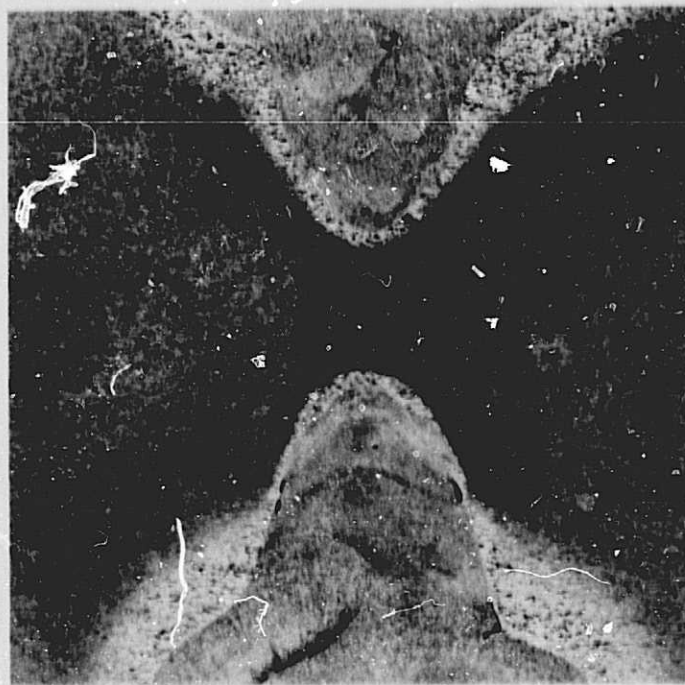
Weld groove preparation for defect test specimens in 1.0-inch aluminum.
